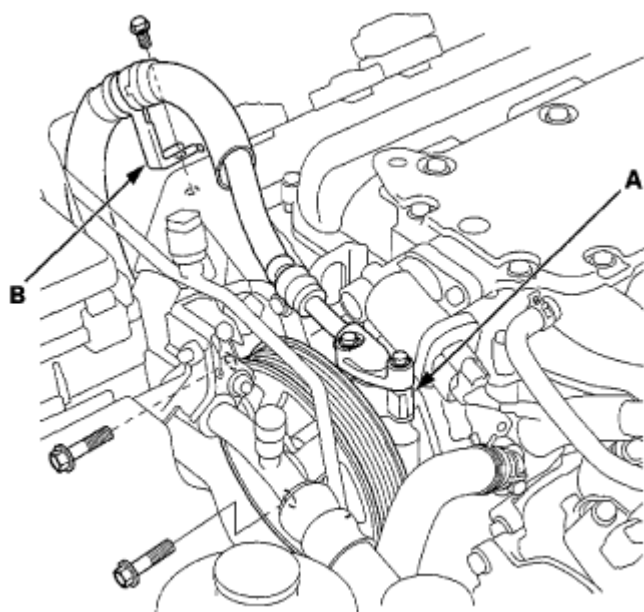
Identifying Power Steering Pump And Power Steering Hose Bracket
